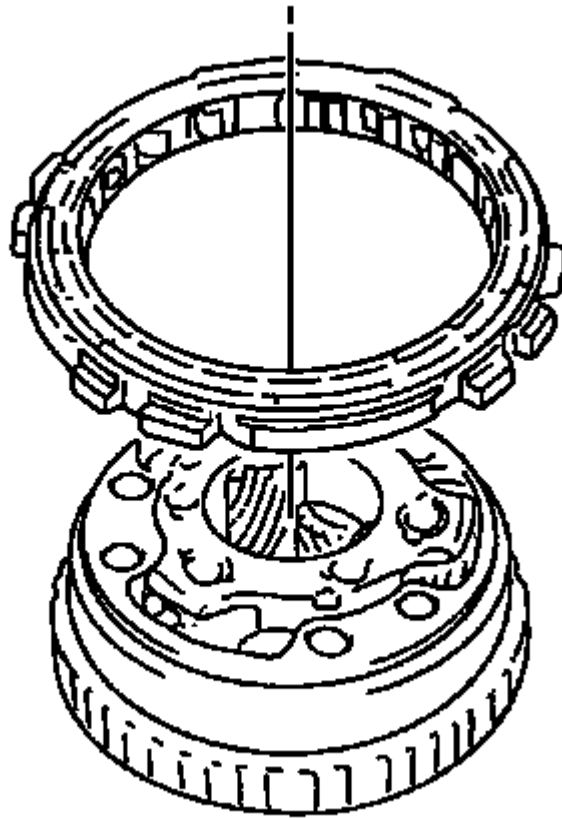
No. 2 One Way Clutch, Planetary Gear & Remove Anti-Rattle Clip
